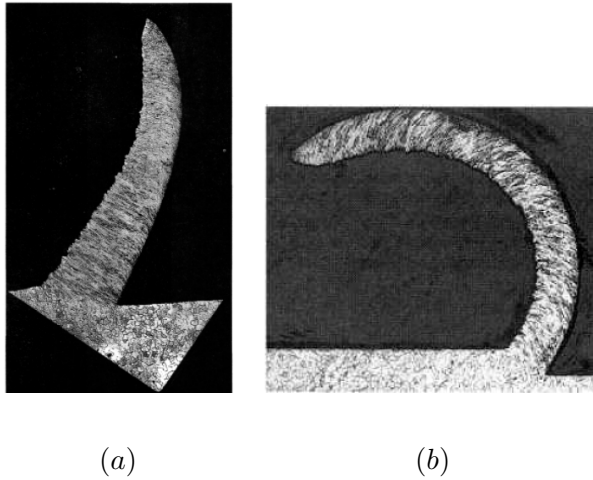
Chip curl in iron for (a) dry and (b) lubricated machining [22].
